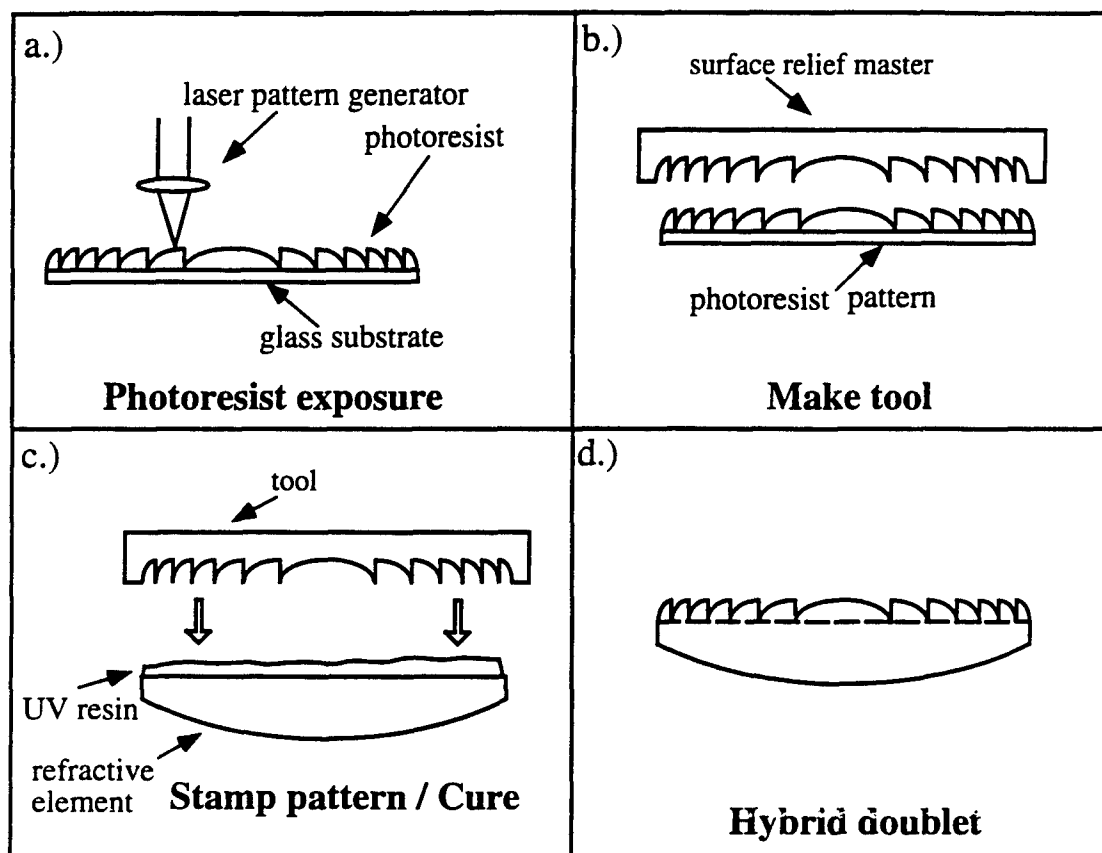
Fabrication process for diffractive elements. a.) Writing the diffractive pattern into photoresist to create master, b.) making the tool from the master, c.) casting the pattern into UV resin on a plano-convex refractive element, d.) the resulting hybrid diffractive-refractive doublet after the UV curing step.
